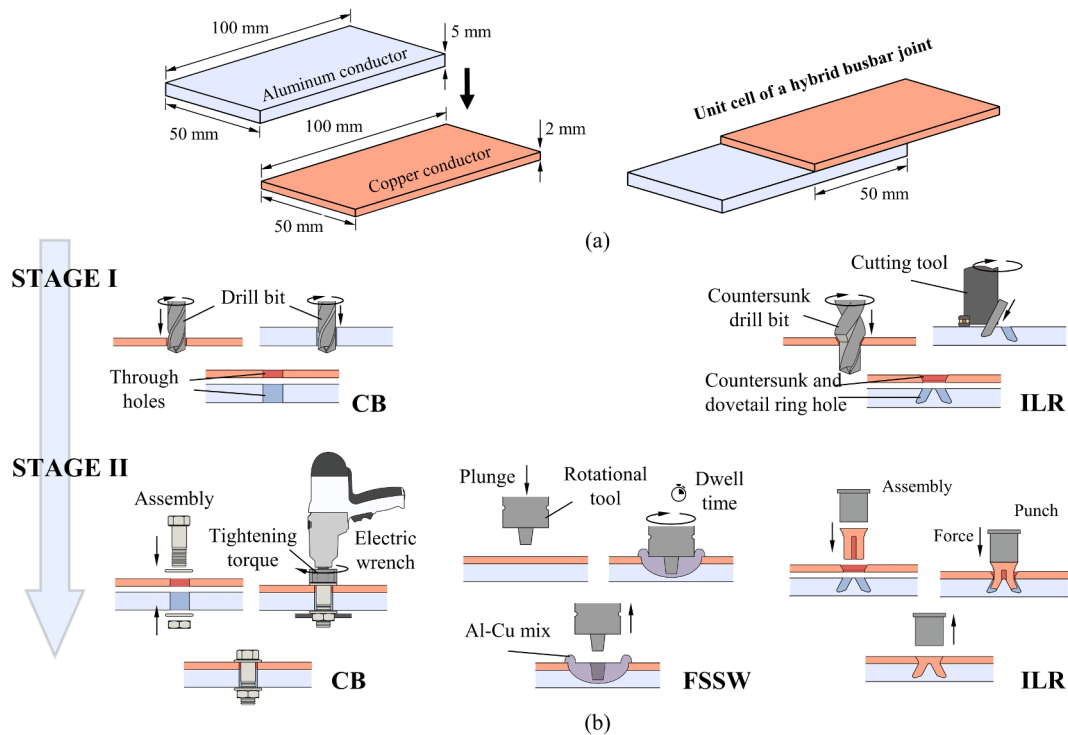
(a) Schematic representation with dimensions of the unit cells of the hybrid busbar joints and (b) details of their fabrication by means of conventional bolting (CB), friction stir spot welding (FSSW), and injection lap riveting (ILR).
